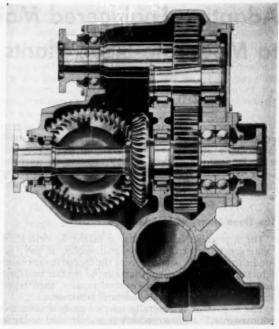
Axle drive consisting of a spur gear mounted on the axle and a mating pinion overhung from the axle-drive bevel-gear unit.
